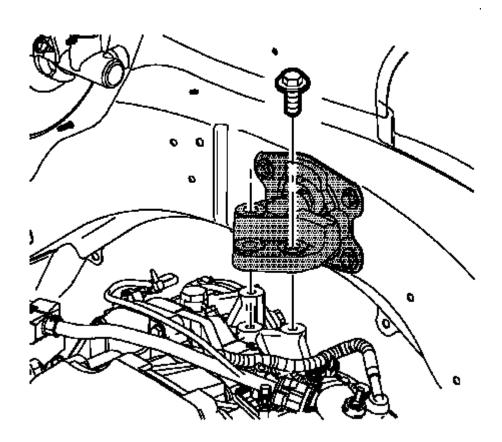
Positioning Powertrain Assembly Courtesy of GENERAL MOTORS COMPANY
